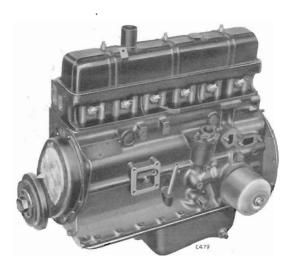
Left-hand front view of Vitesse reconditioned unit
